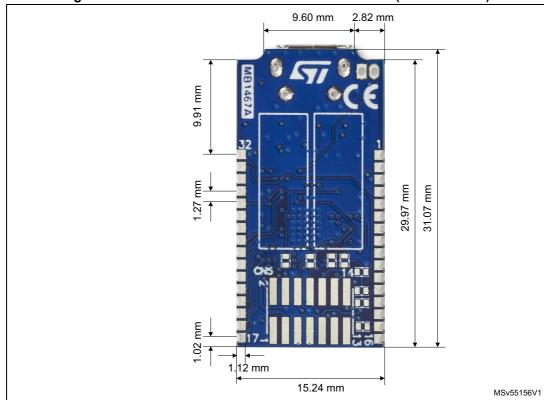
STLINK-V3MODS mechanical dimensions (in millimeters)
